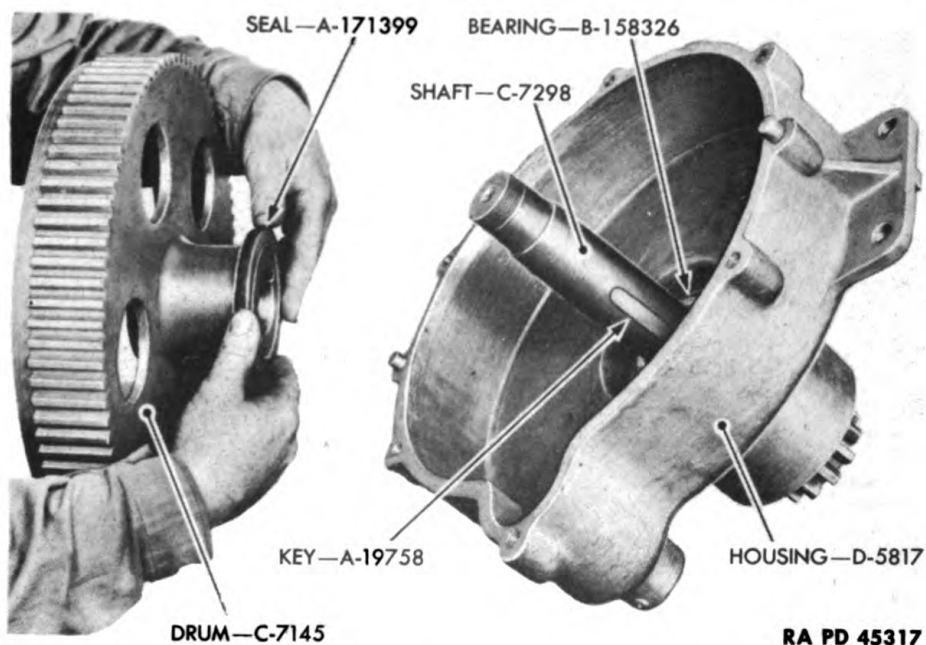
Assembling Elevating Brake Drum, Shaft and Housing
